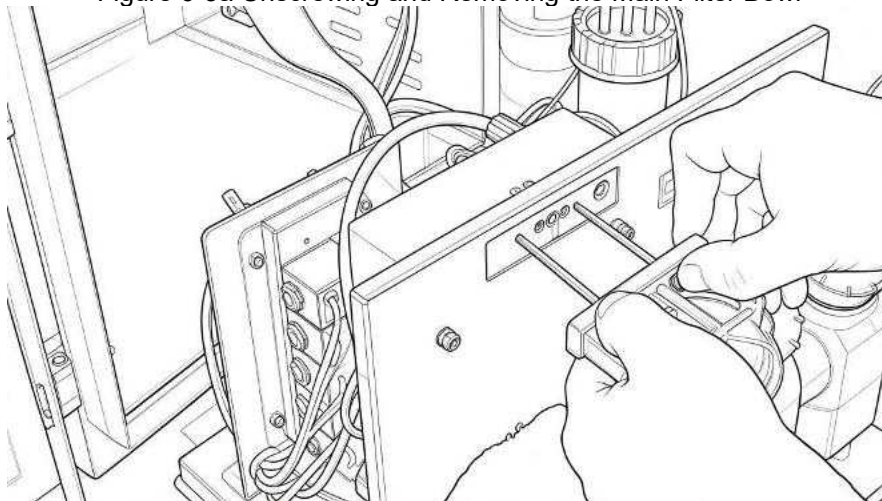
Installation Location and Fastener Disassembly/Reassembly of the Main Filter inside the Ink Circuit Cabinet
